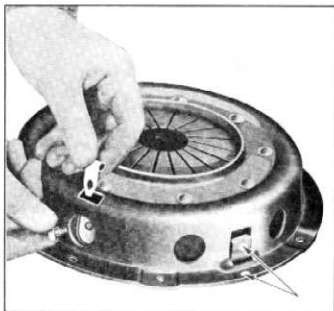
Removing or Replacing Pressure Plate Retracting Springs
